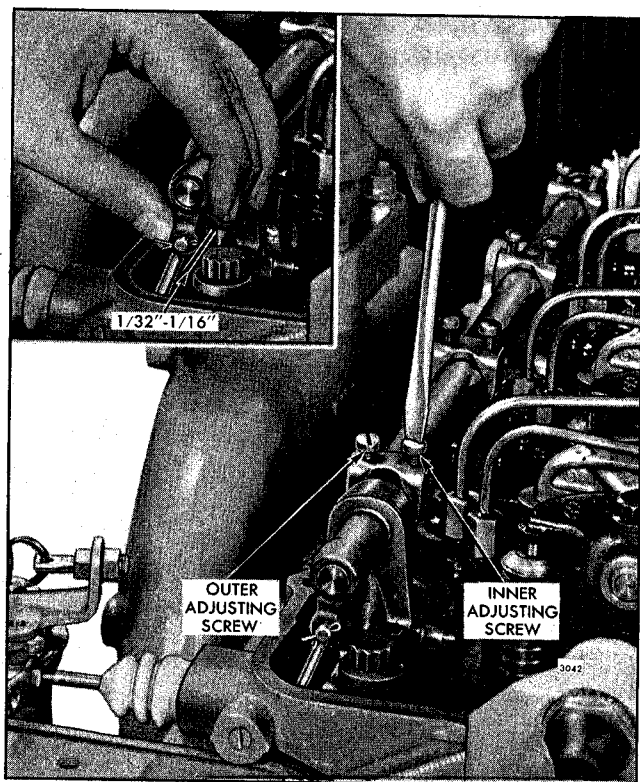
Adjusting Injector Rack Control Lever Adjusting Screws
